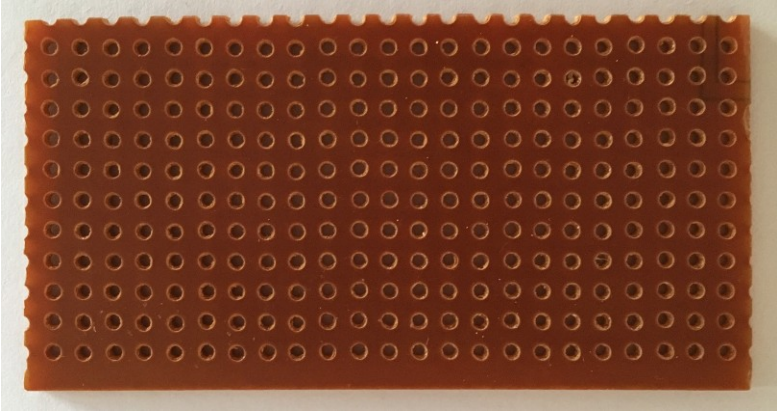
Strip Board Cut to Size, Top (Component) Side View
